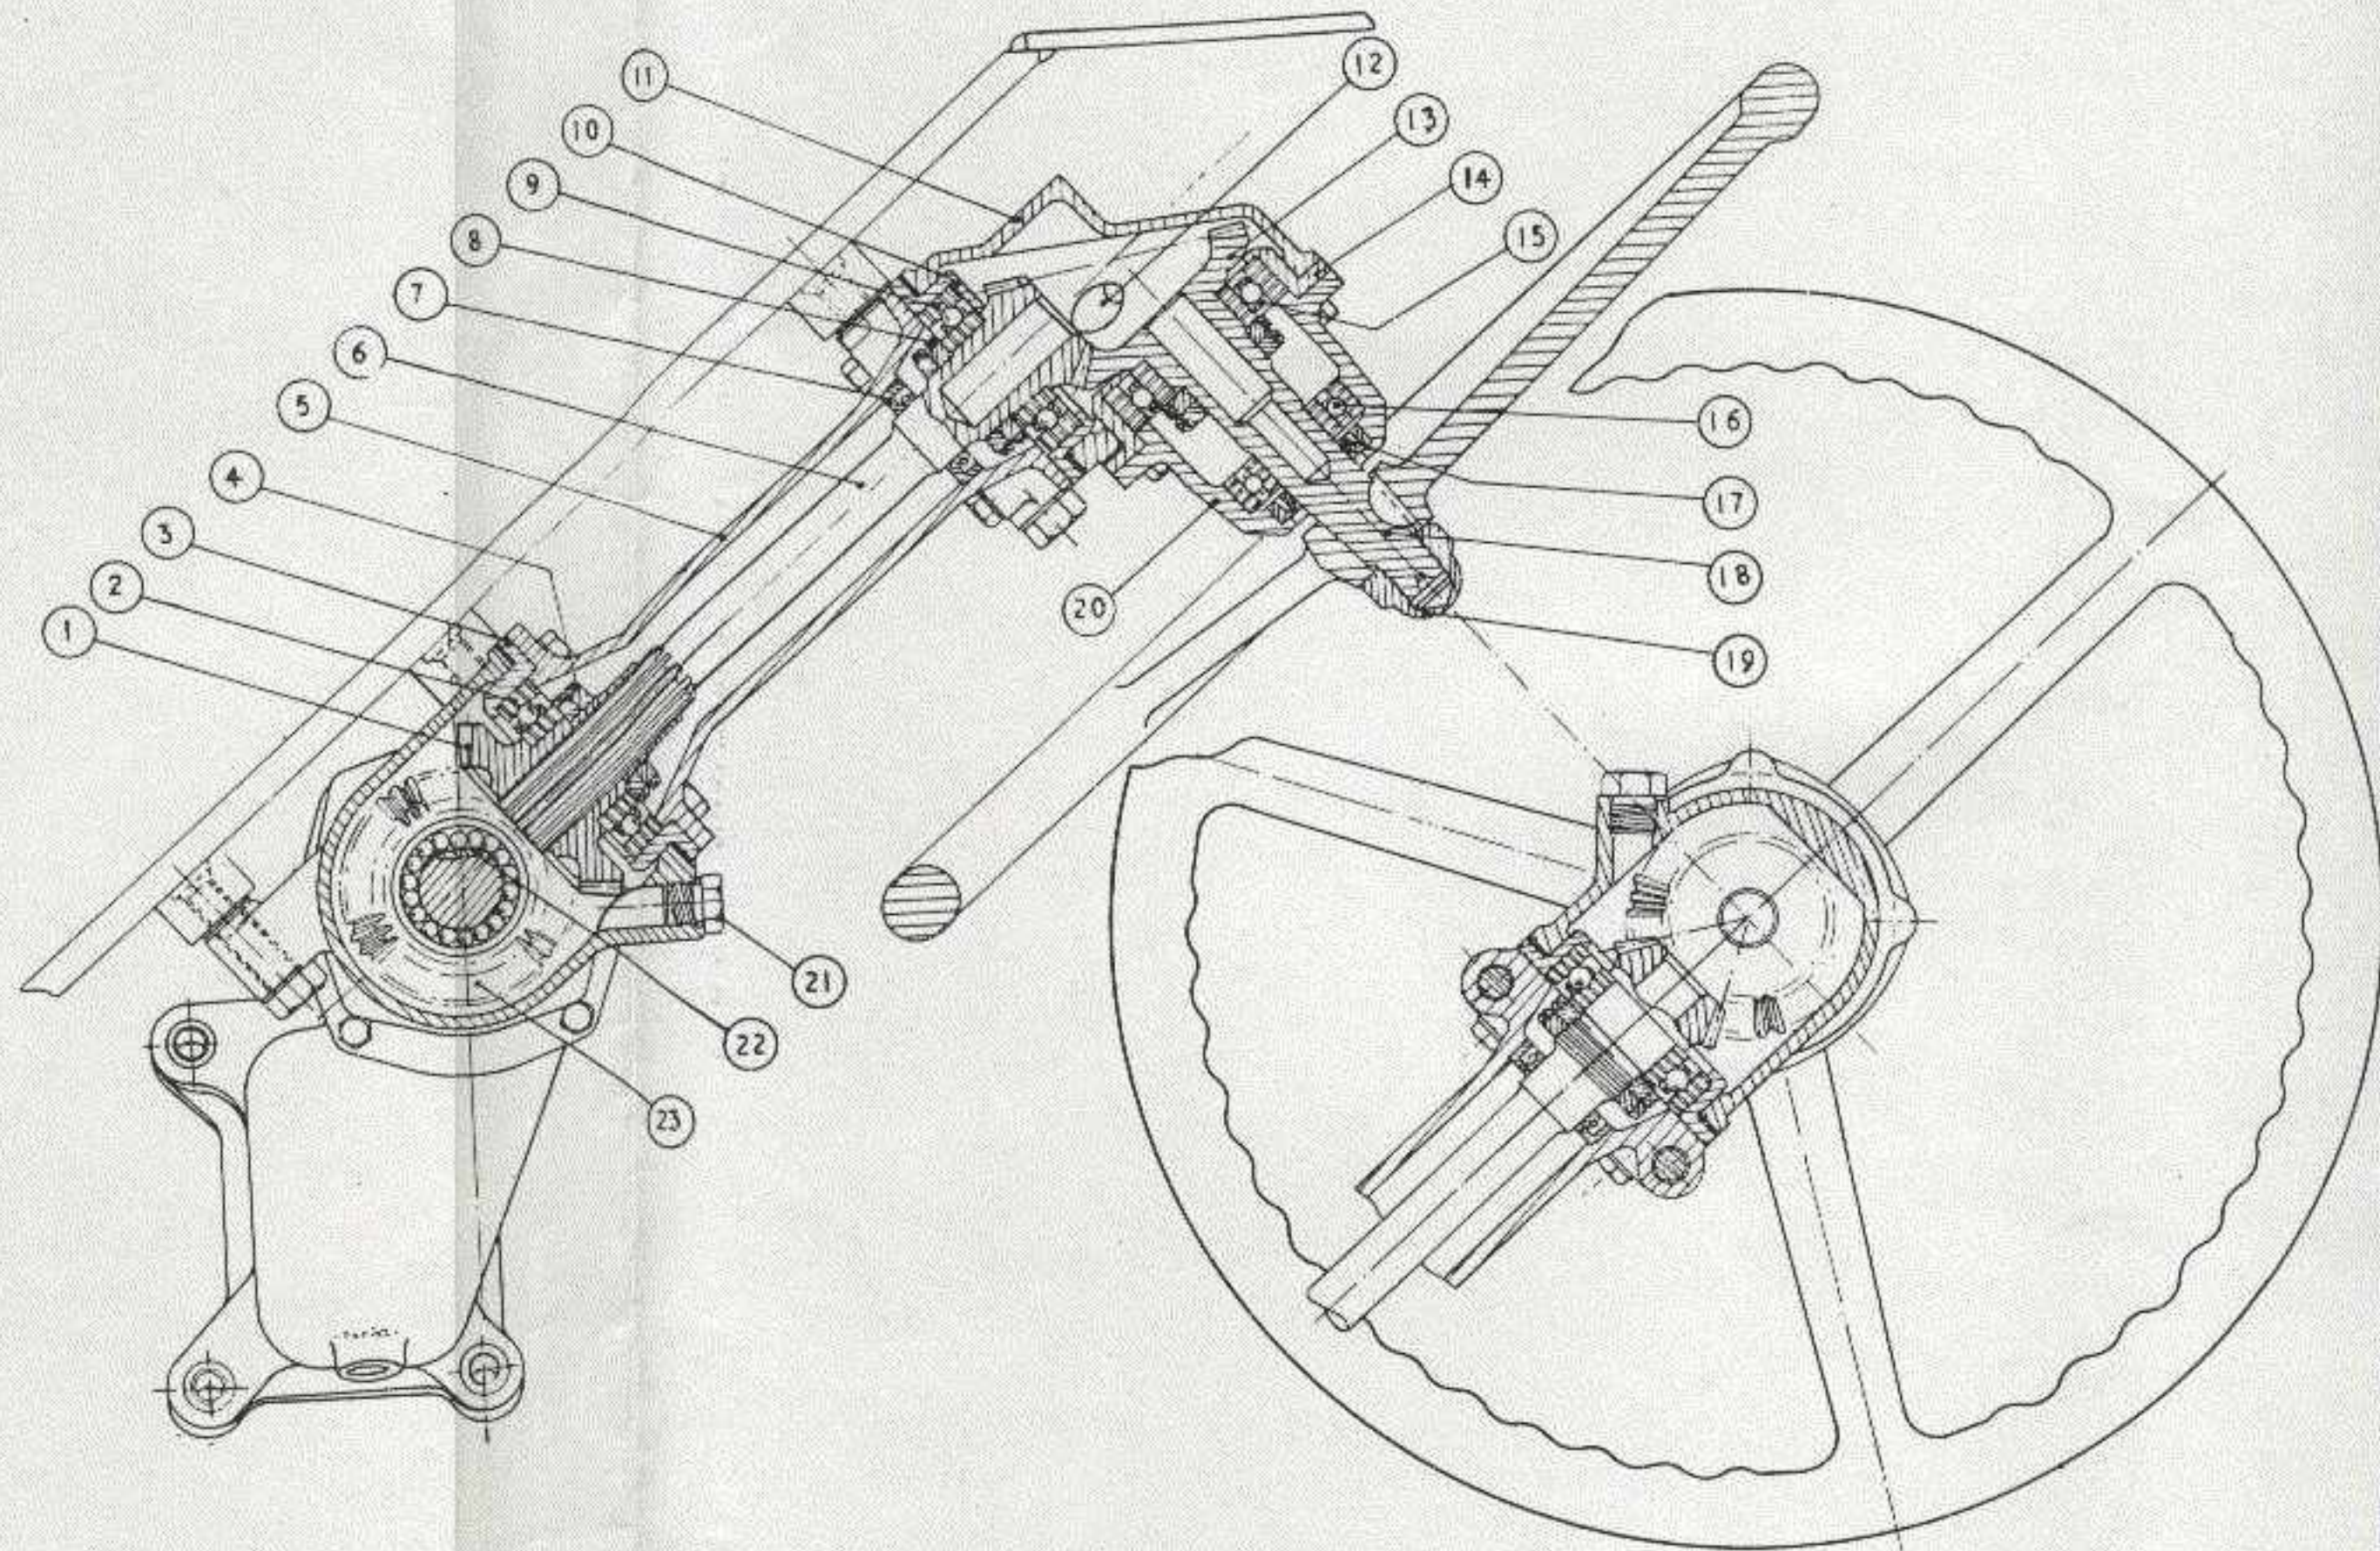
STEERING GEAR - GENERAL ARRANGEMENT - END ELEVATION
